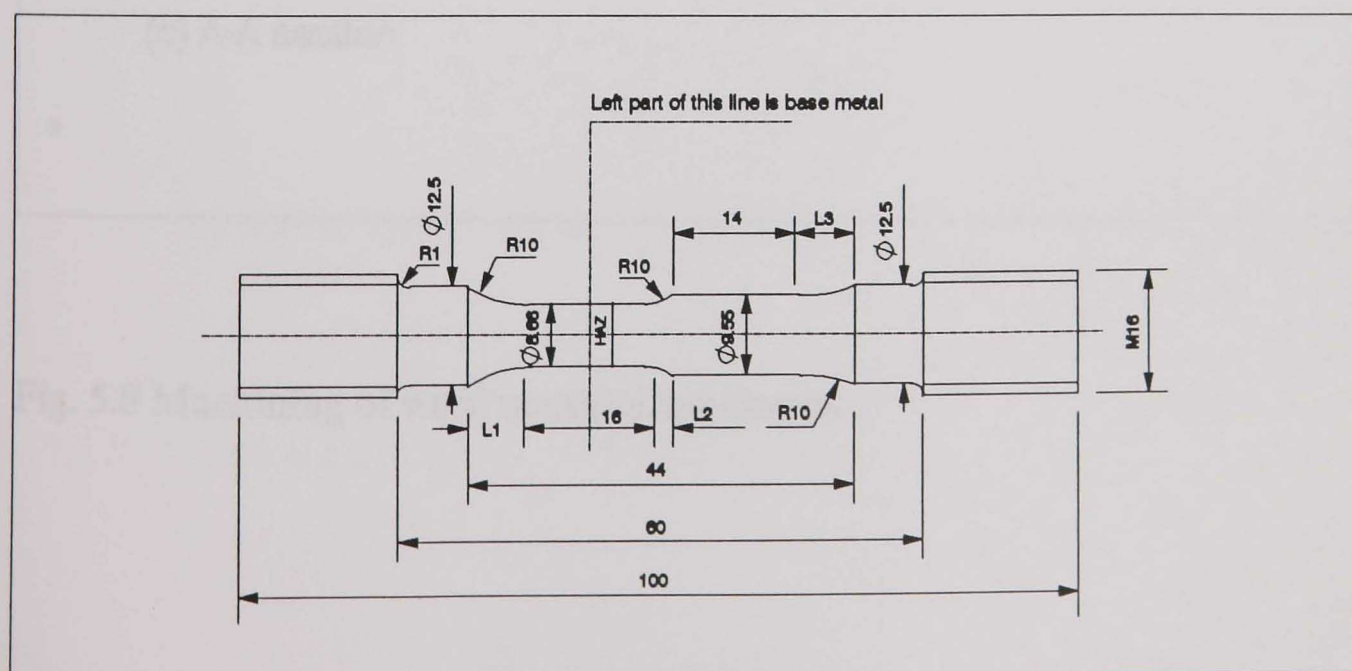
Removal of base material specimens (dimensions in mm).
